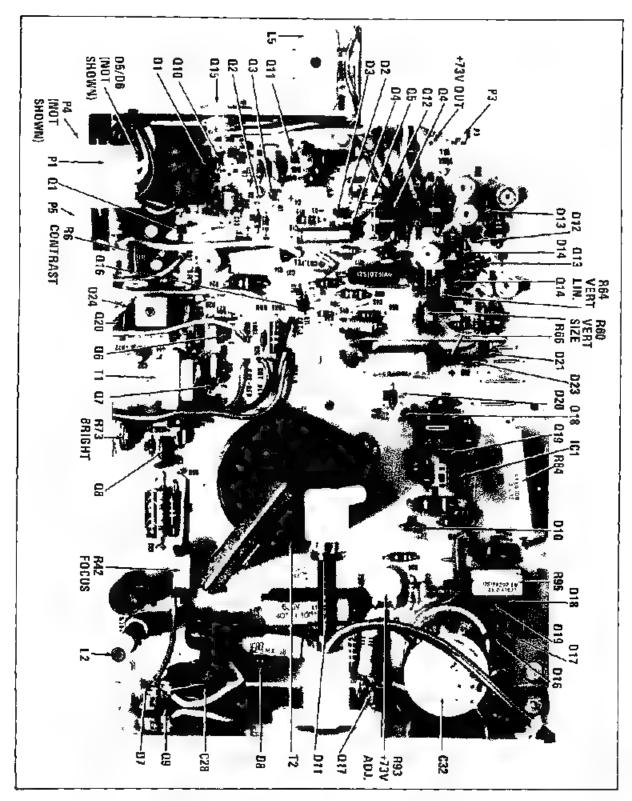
Motorola Monitor Circuit Board Detarl—Component Location
